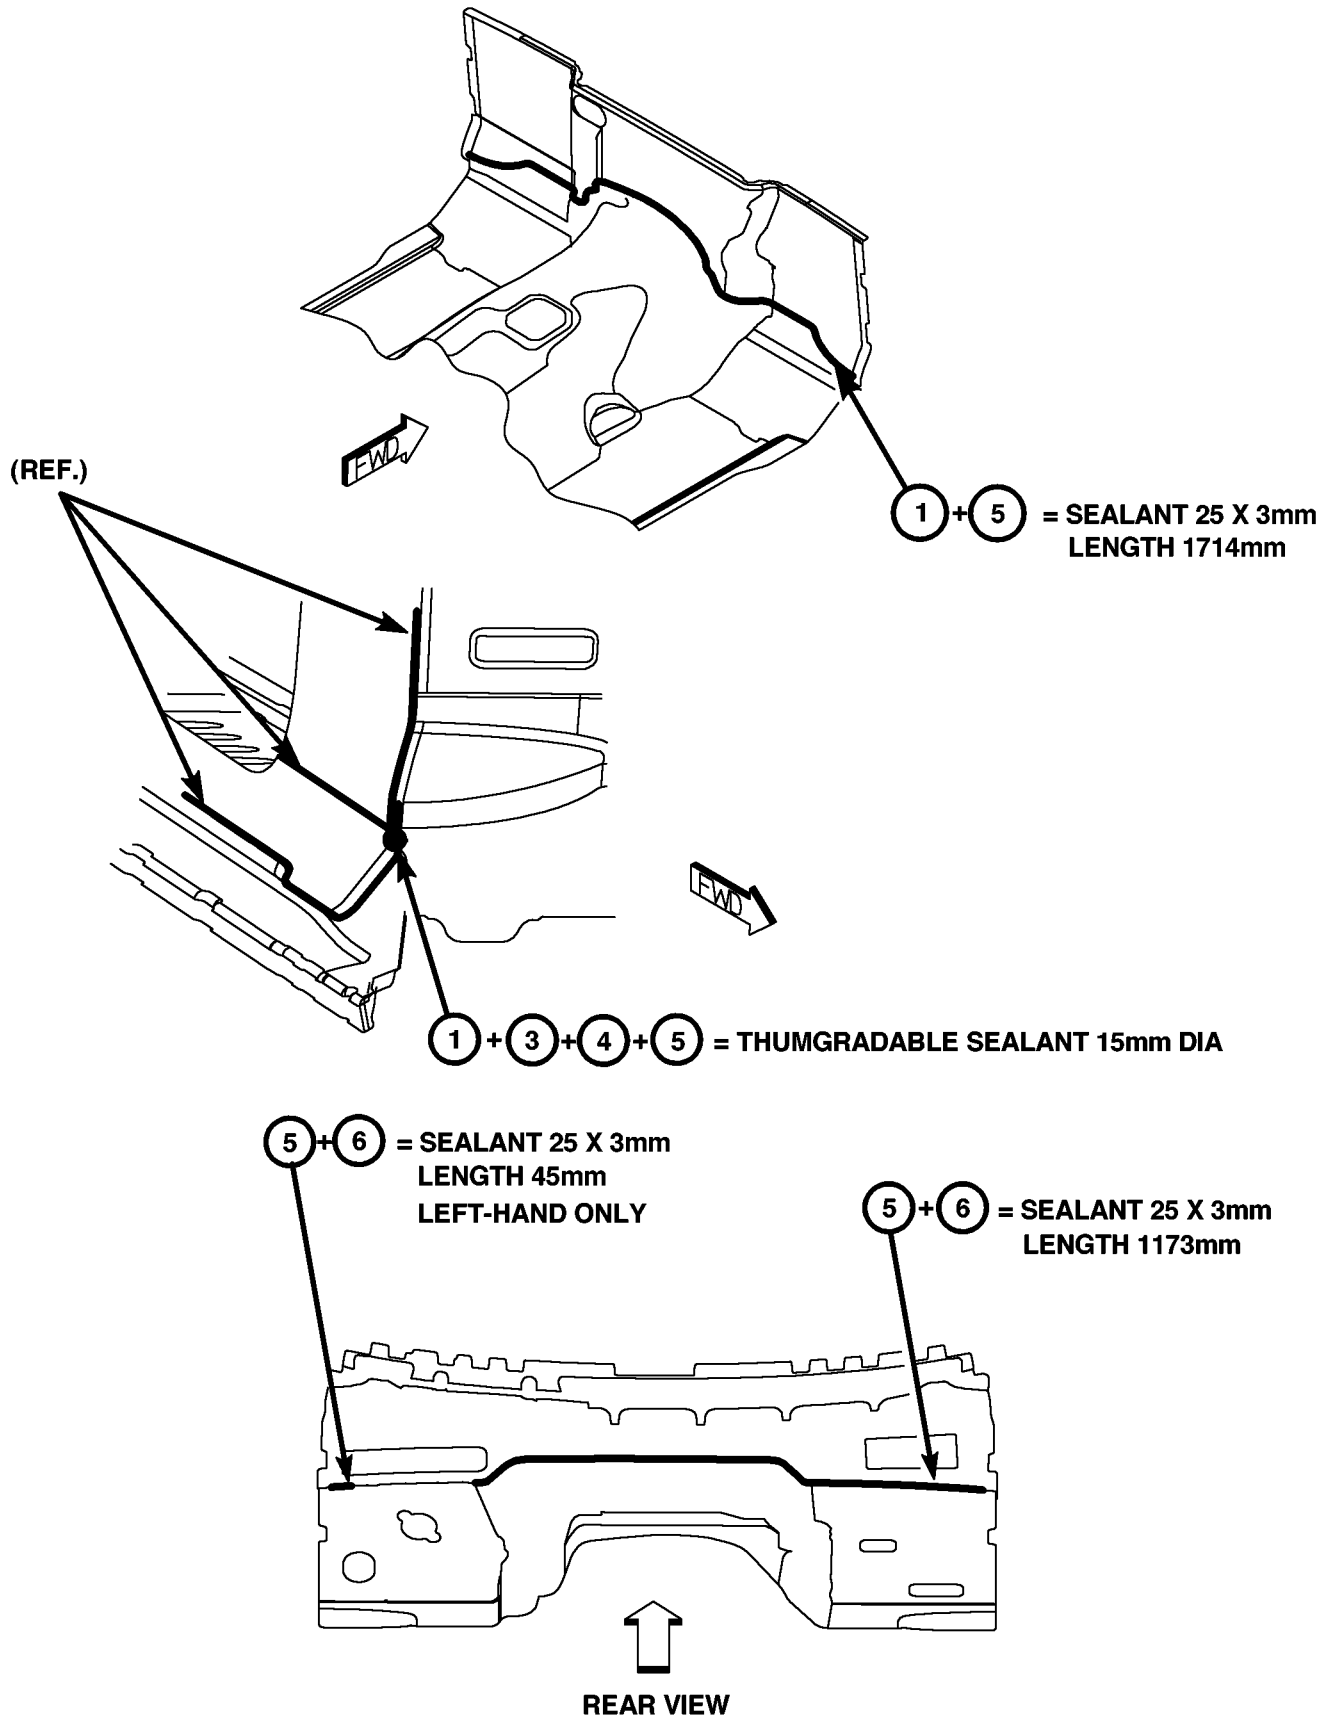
FRONT FLOOR PAN & DASH PANEL
